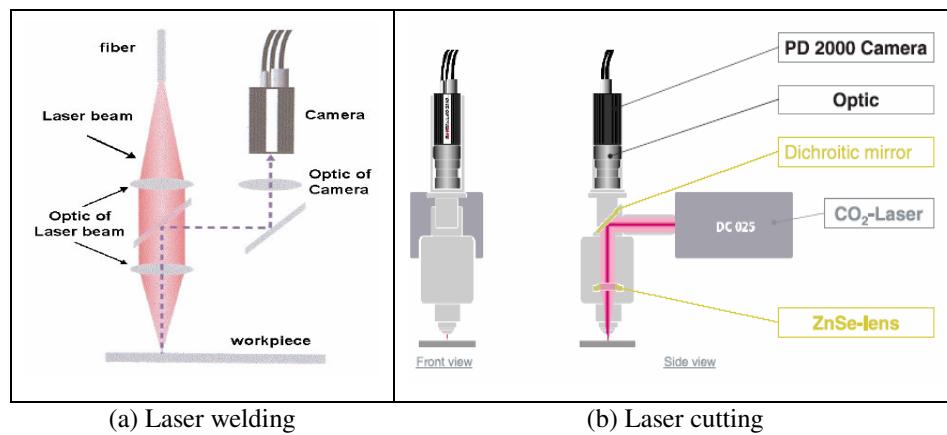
Monitoring system for (a) laser welding and (b) laser cutting ([14]- [16])
